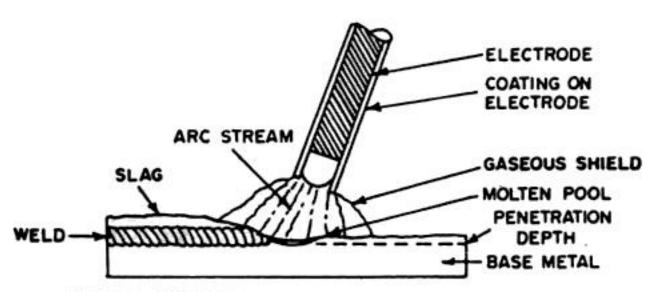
SHIELDED-METAL ARC WELDING PROCESS
